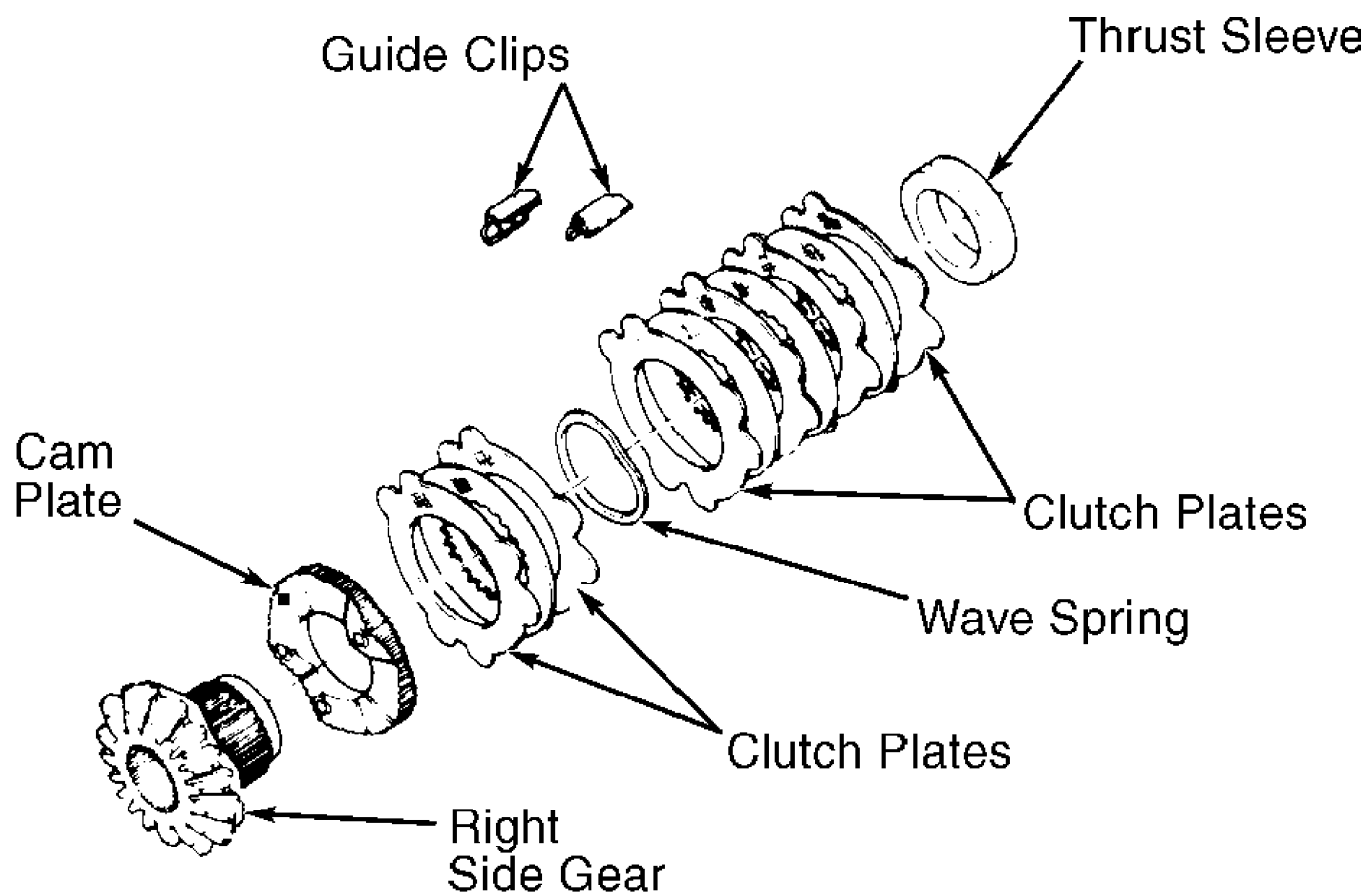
Exploded View Of 2-Piece Case Locking Differential
